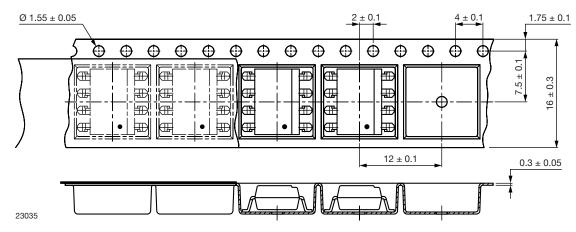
Tape and Reel Packaging (1000 pieces on reel)
